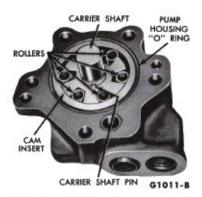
Roll Type Pump Housing, Carrier & Shaft
